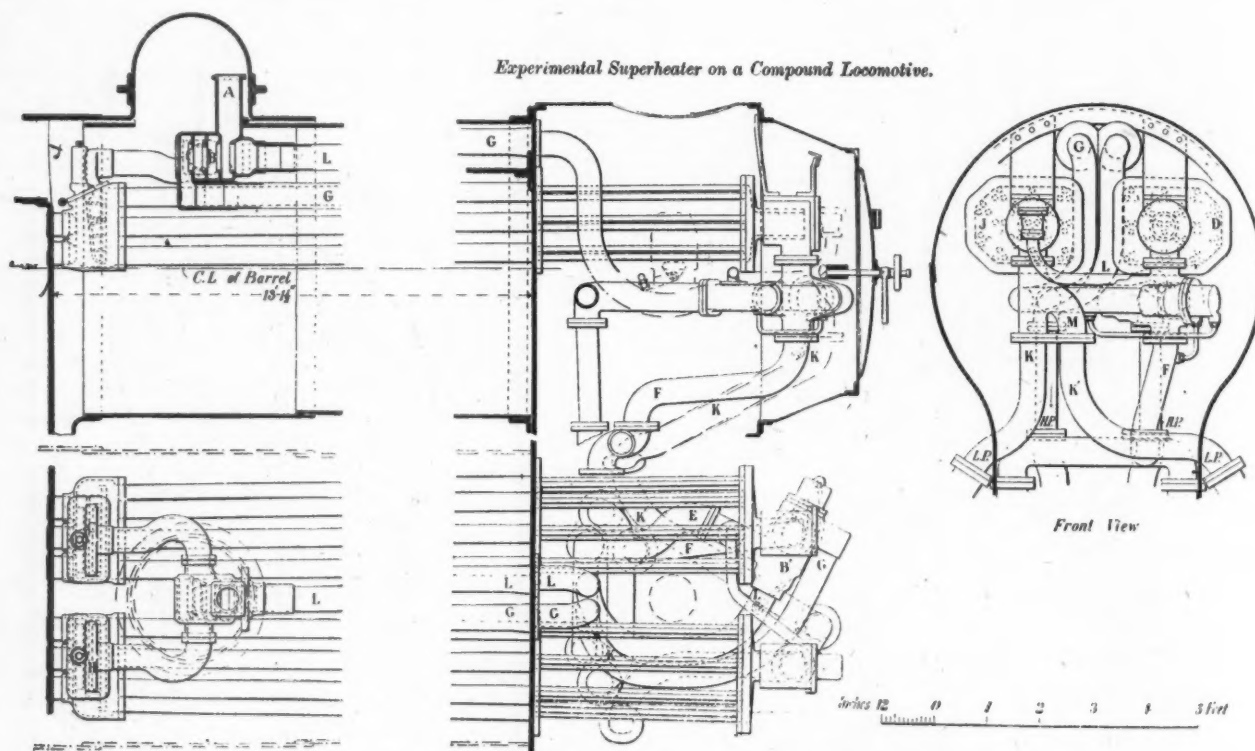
COCKERILL LOCOMOTIVE SUPERHEATER.
